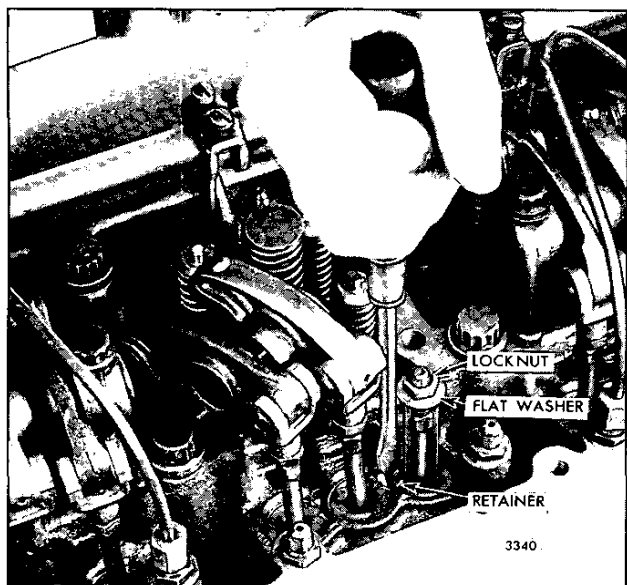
Removing Push Rod from Upper Side of Cylinder Head Using Tool J 3092-01
